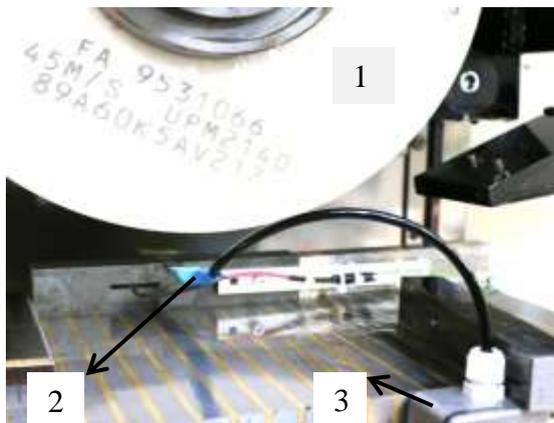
Experimental set-up: 1) Grinding wheel, 2) Workpiece with embedded sensor inlay, 3) Box with measurement electronics
